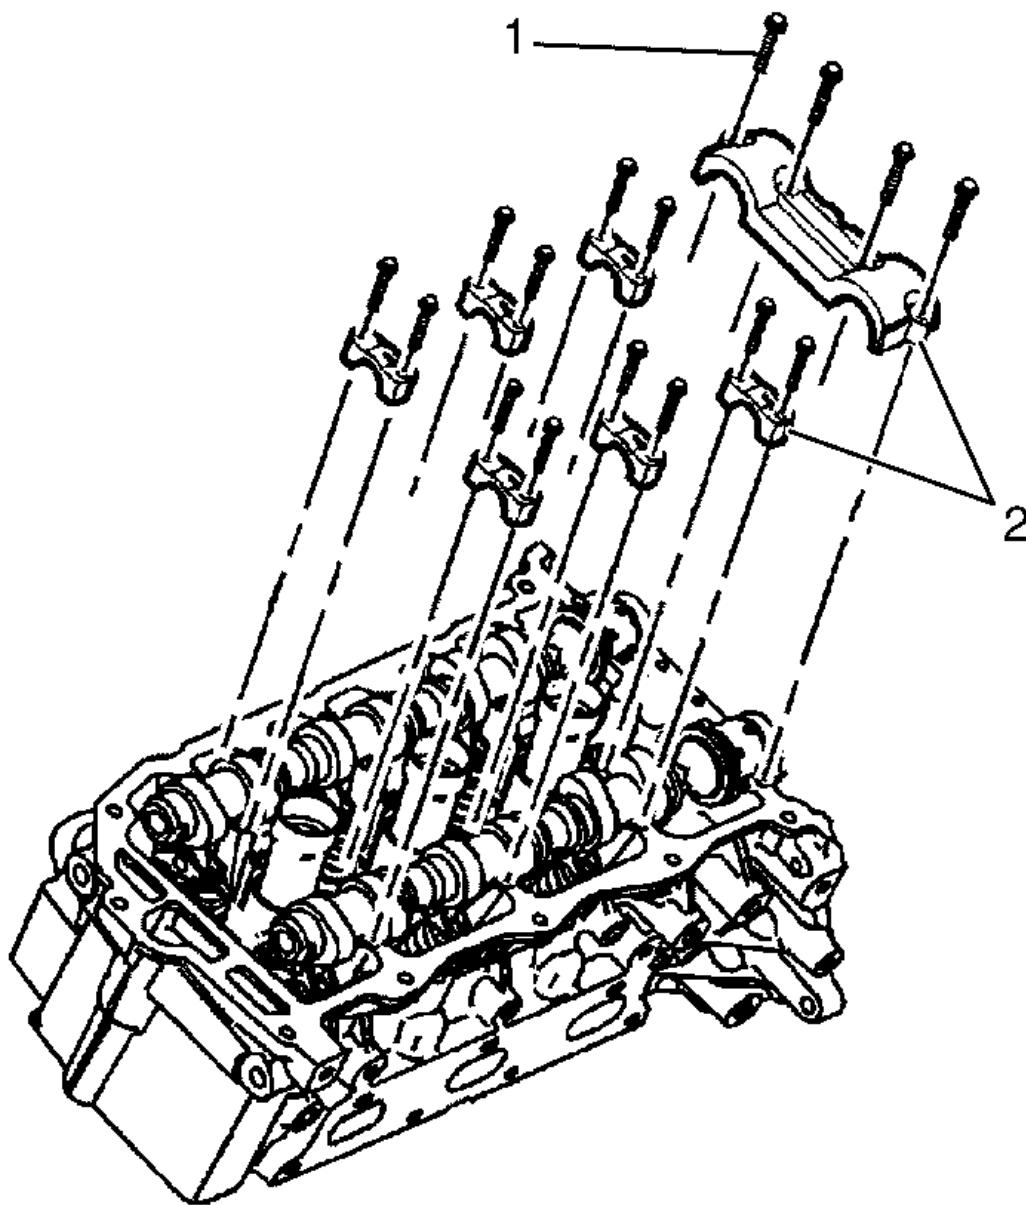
View Of Right Cylinder Head Camshaft Cover Rail
